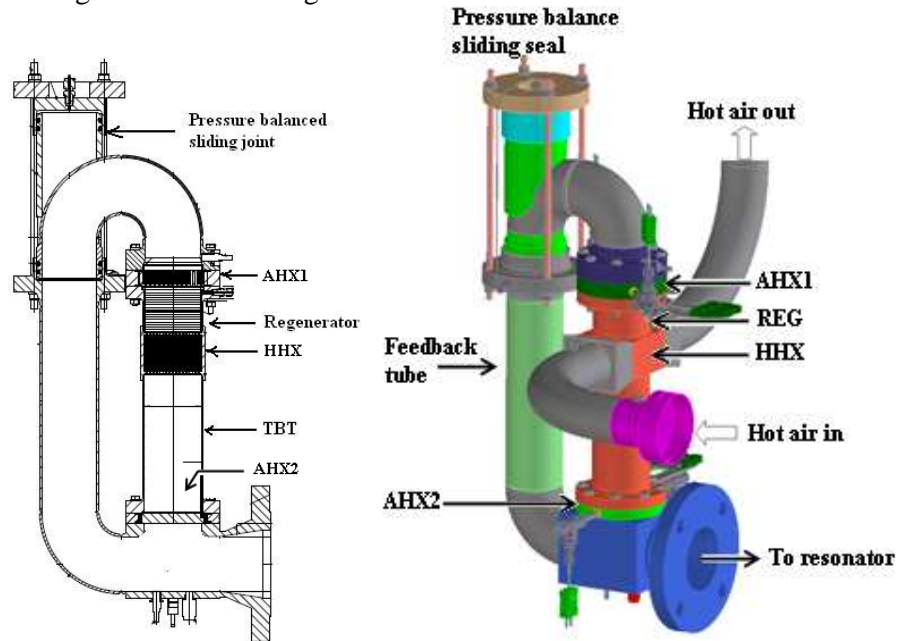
A schematic- (left) and a CAD-drawing (right) of the torus part of the engine
